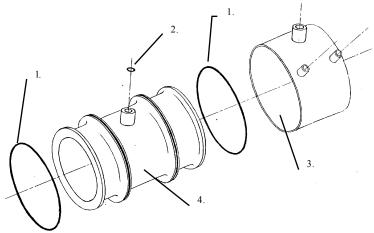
WATER COOLING JACKET ASSEMBLY
